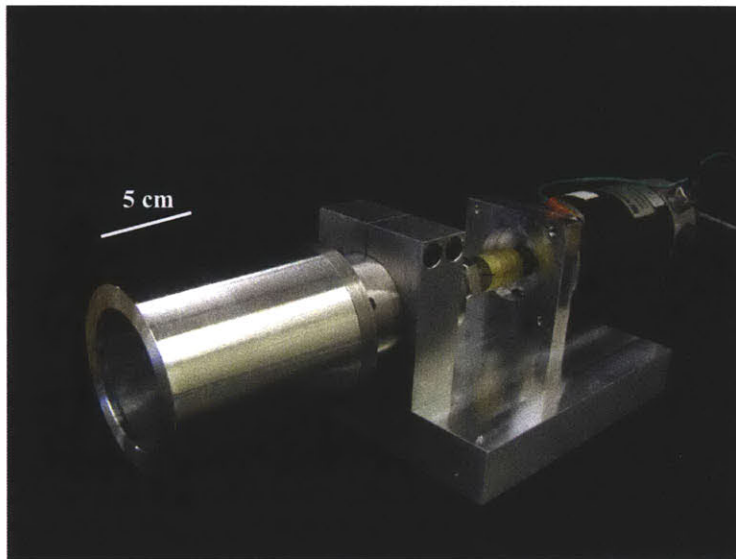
Assembled centrifuge. The bearing set and drive motor are mounted to a common base with a kinematic coupling.
